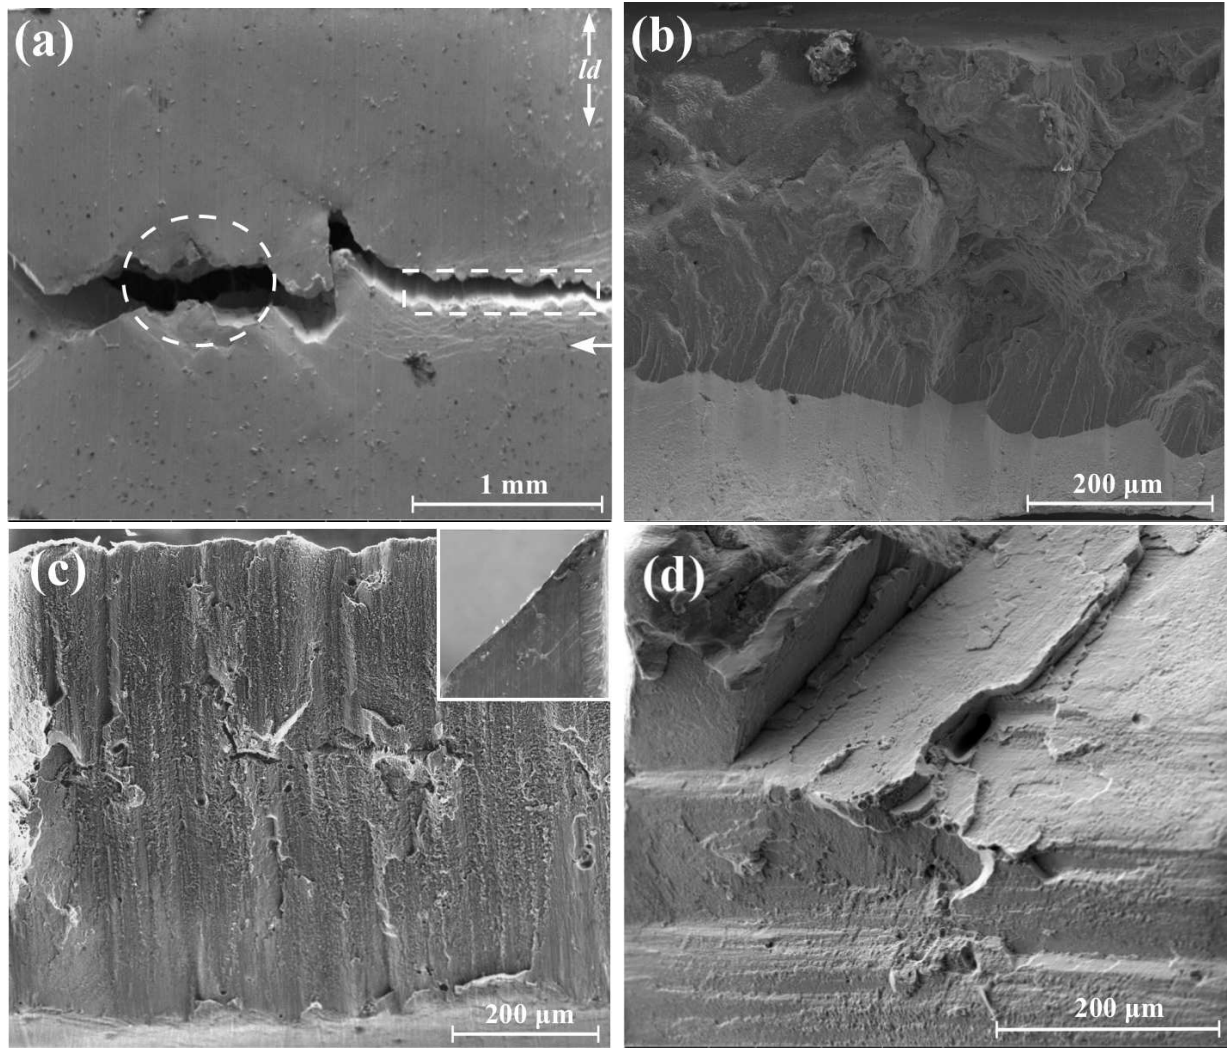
SEM images of a 0.51mm thick sheet specimen tested at 760°C/758MPa. (a) The region near the fracture surface reconstructed after rupture (the loading direction is  $ld$  and the sheet thickness is into the plane). (b) The fracture morphology of the region marked by a dotted circle in (a) (the loading direction is into the viewed plane). (c) The fracture morphology of the region marked by a dotted rectangle in (a) and the inset shows the side view marked by the arrow in (a). (d) Zoomed view of the fracture surface showing stepped cleavage planes.
